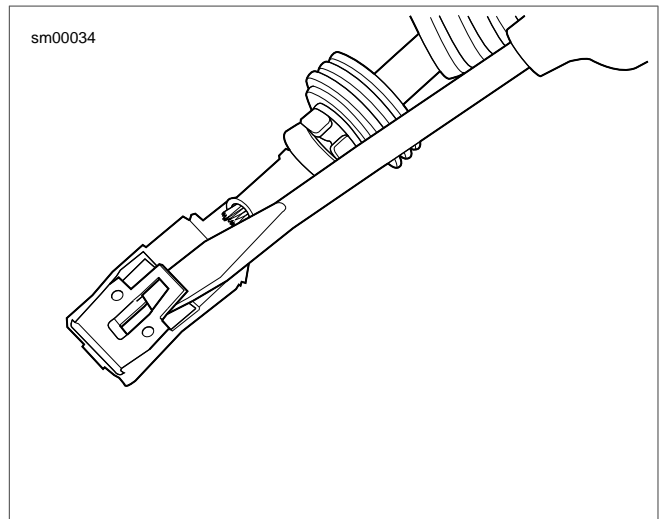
Delphi Main Fuse Housing: Bend Tang
